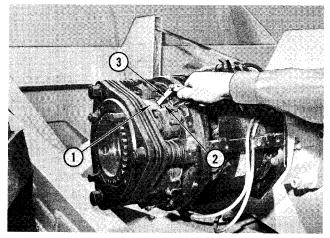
CHECKING BRAKE CLEARANCE 1. Floating Plate 2. End Beli 3. Feeler Gauge
